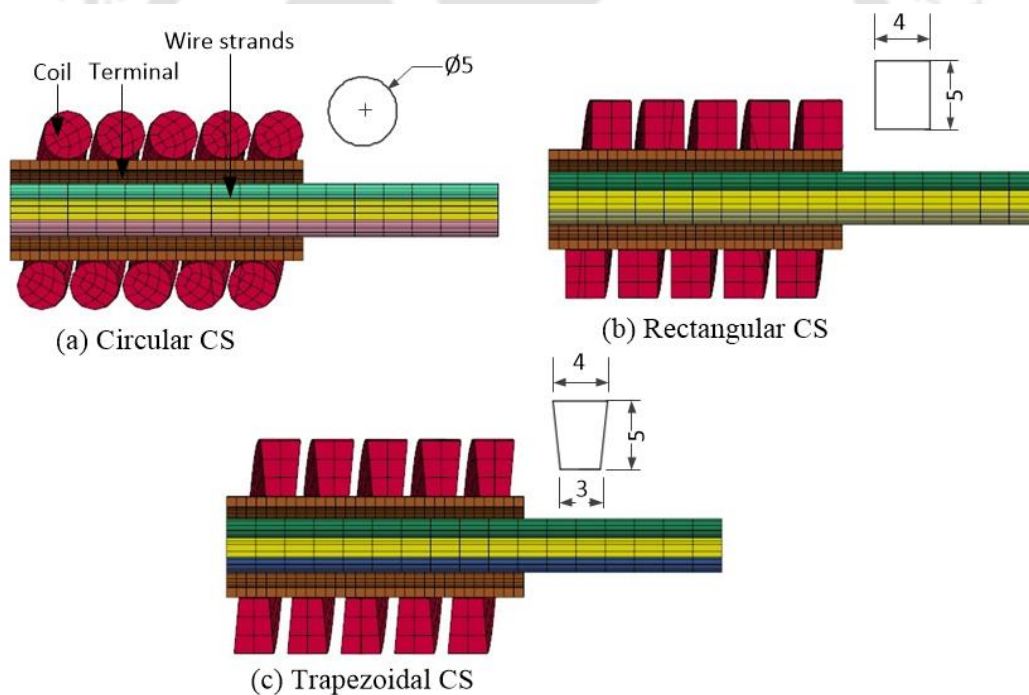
Sectional CS view of the assembly with different cross-section (a) Circular (b) Rectangle and (c) Trapezoidal
